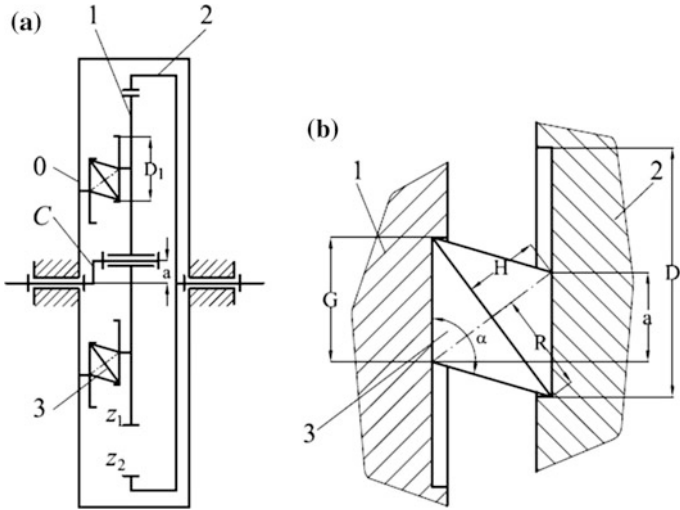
Kinematics of a first planetary mechanism with two planet gears
